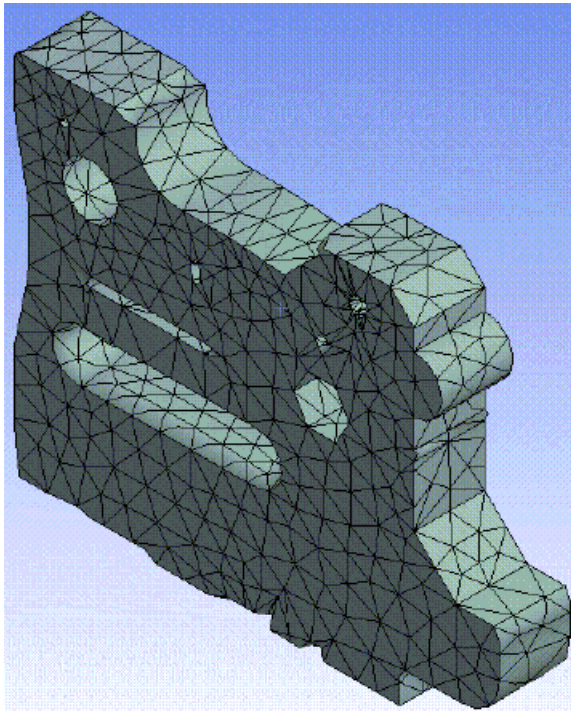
Example (e) Defeature Size Set to 1 and Element Order Set to Linear
